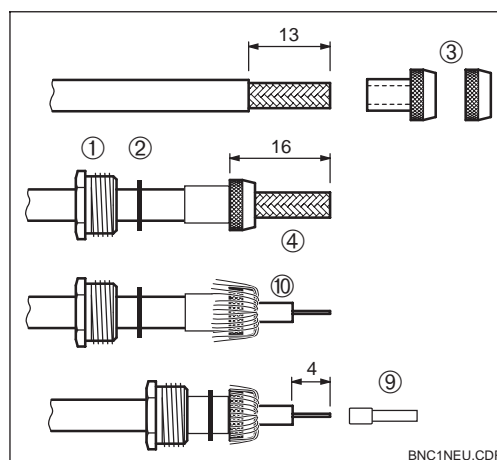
Termination of pH connecting line for installation of BNC elbow plug
